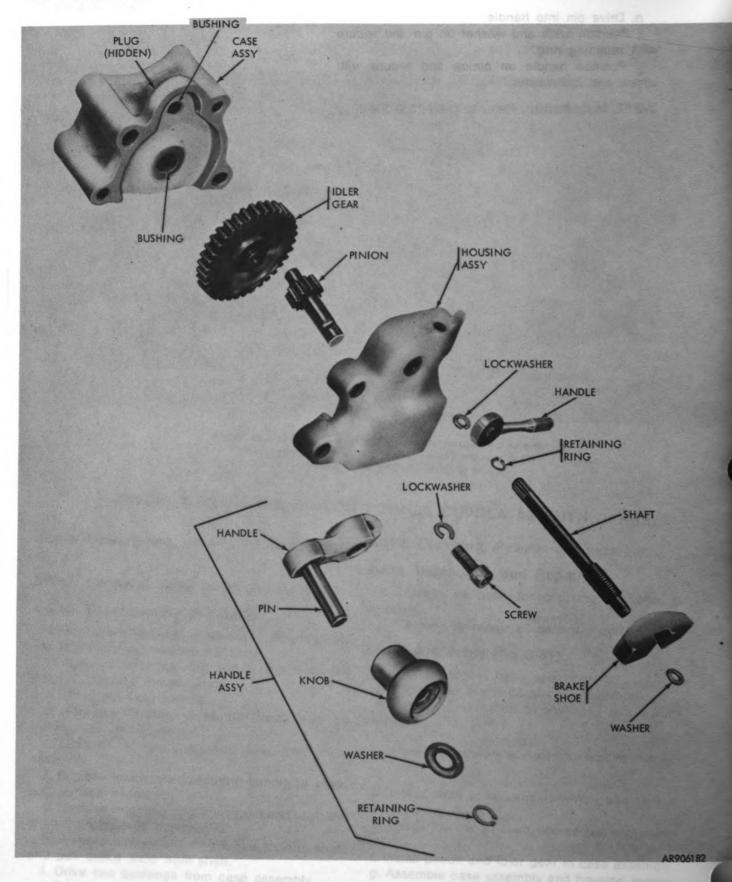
Low-profile cupola azimuth gearbox disassembly or assembly (vehicles serial numbered A1001 thru
